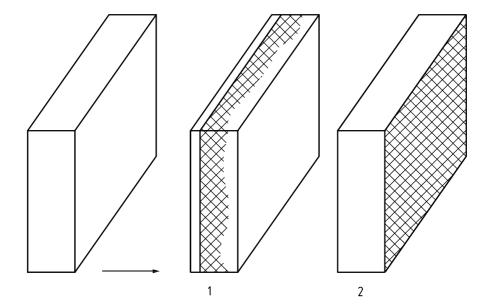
b) - Metal armour sheet (internally mounted) - Remove
